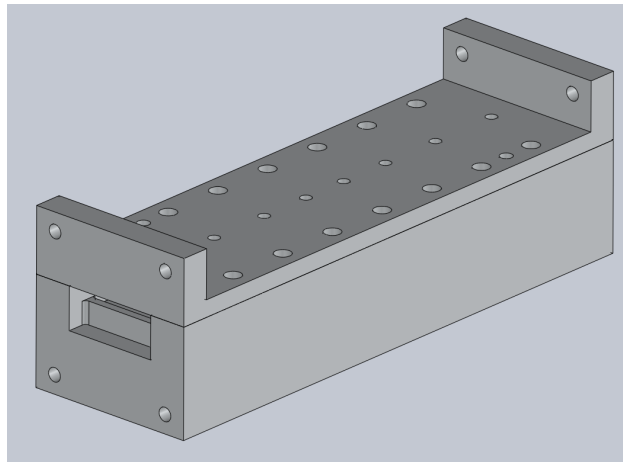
3D manufacturing plans of the in-line hybrid SIR filter.
